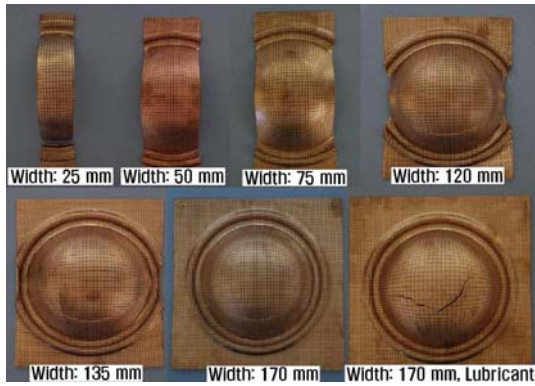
Configuration after dome stretching test of the longitudinal specimens
